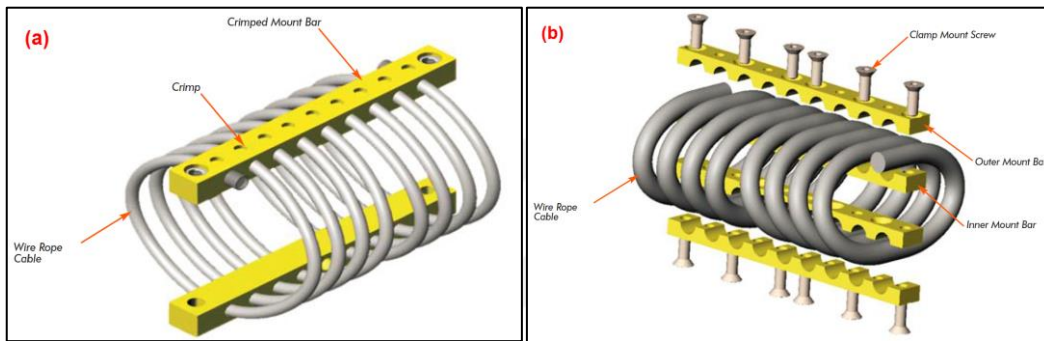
Crimped (a) and Clamped (b) Helical WRI [38].
